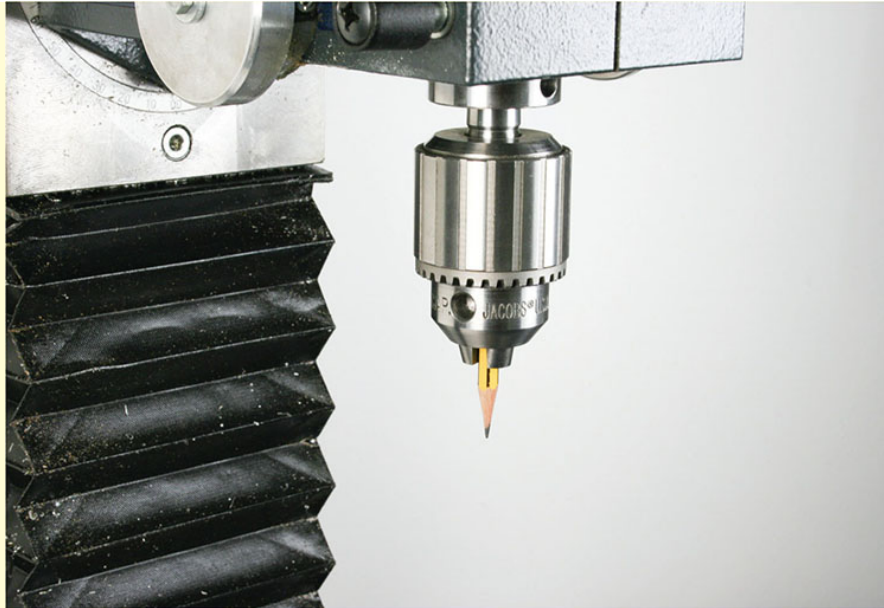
Use a pencil or pen in a drill chuck to draw the toolpath.
